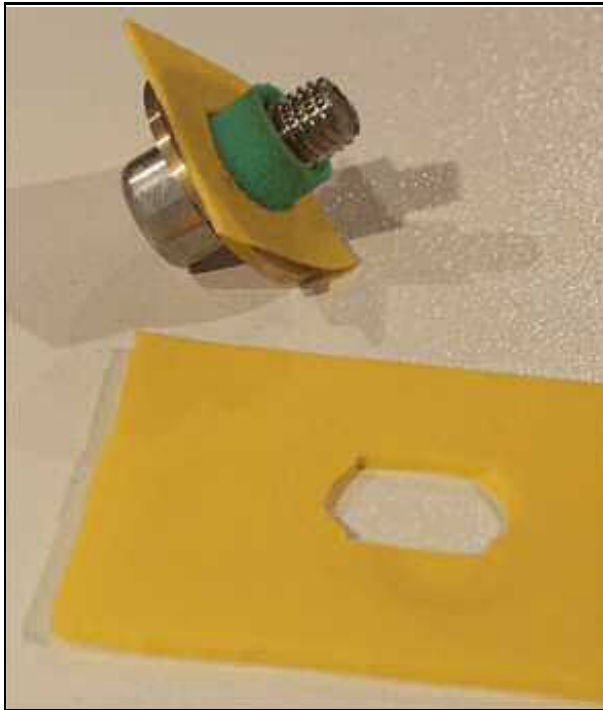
Body coil support: Clamping nut upper side, support nut lower side
